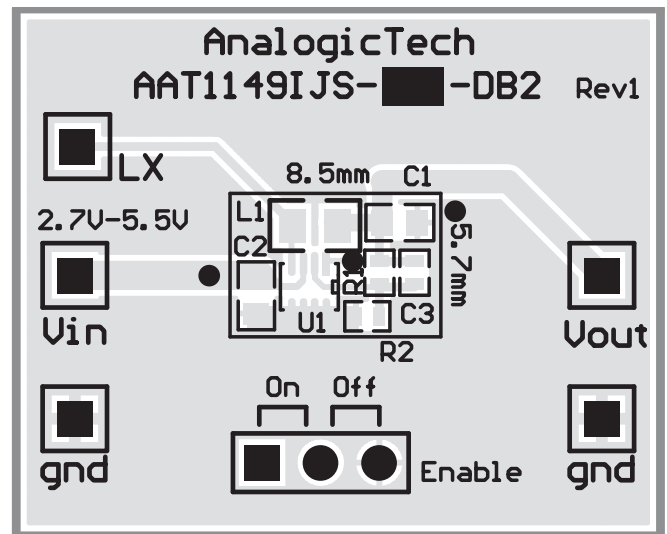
Minimum Footprint Evaluation Board Using 2.0x1.25x1.0mm Inductor.
